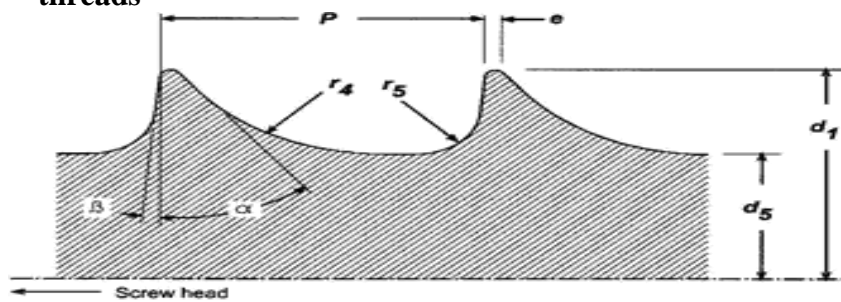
Schematic diagram of HA screw thread dimension (Table 1)
